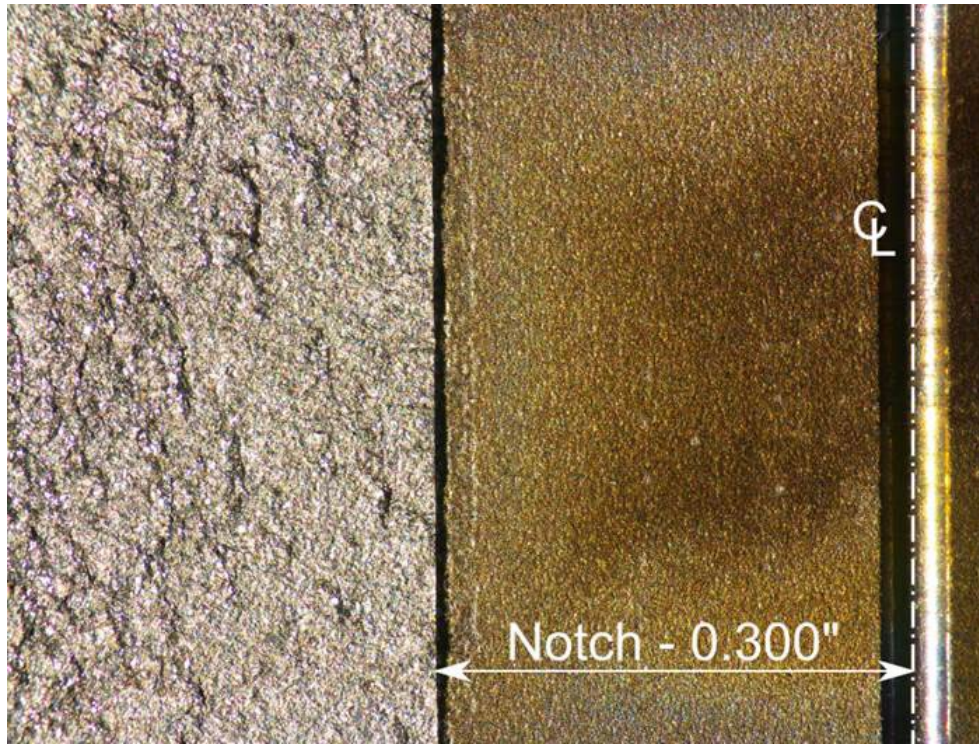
Fatigue/fracture surface taken from HH rail CCT test specimen showing rough fatigue crack surface
